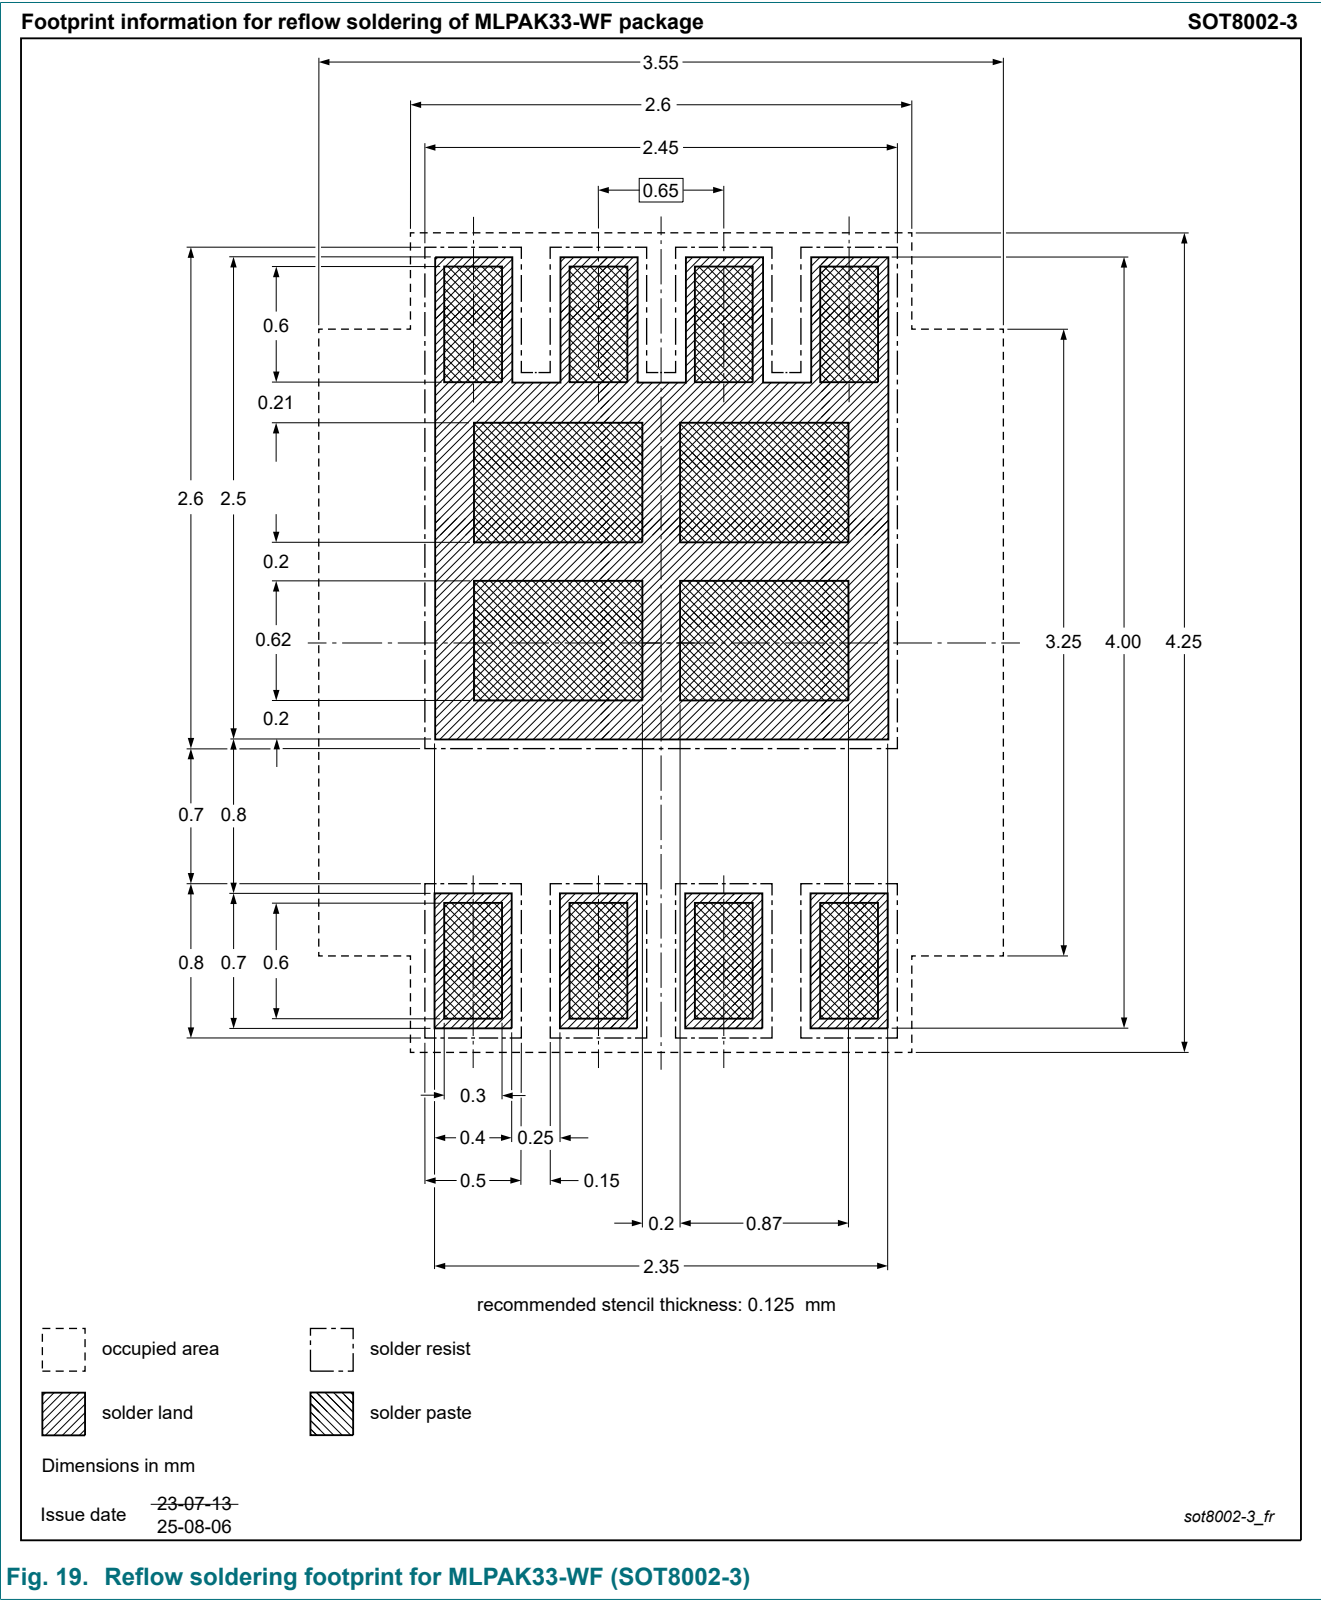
Reflow soldering footprint for MLPAK33-WF (SOT8002-3)
